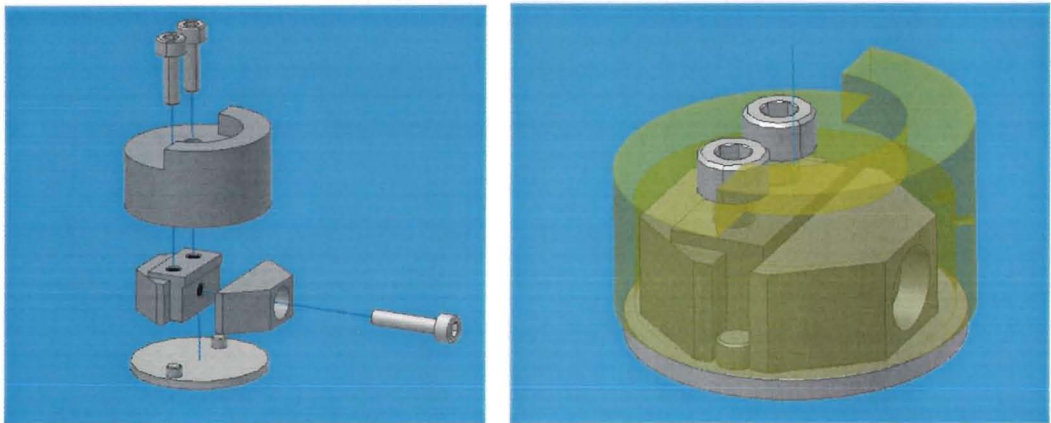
Instrument wheel interface. a) Exploded view. b) Assembled view.
